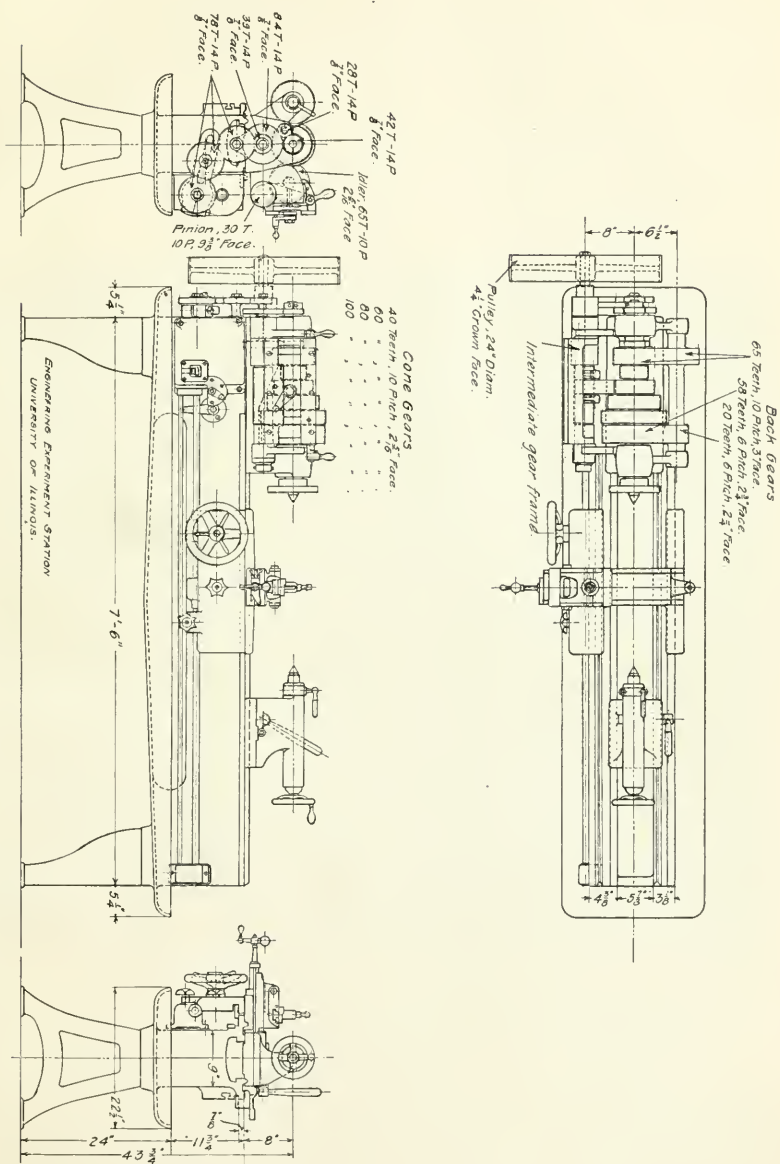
LATHE USED IN THE TESTS WITH HIGH-SPEED TOOL STEELS
